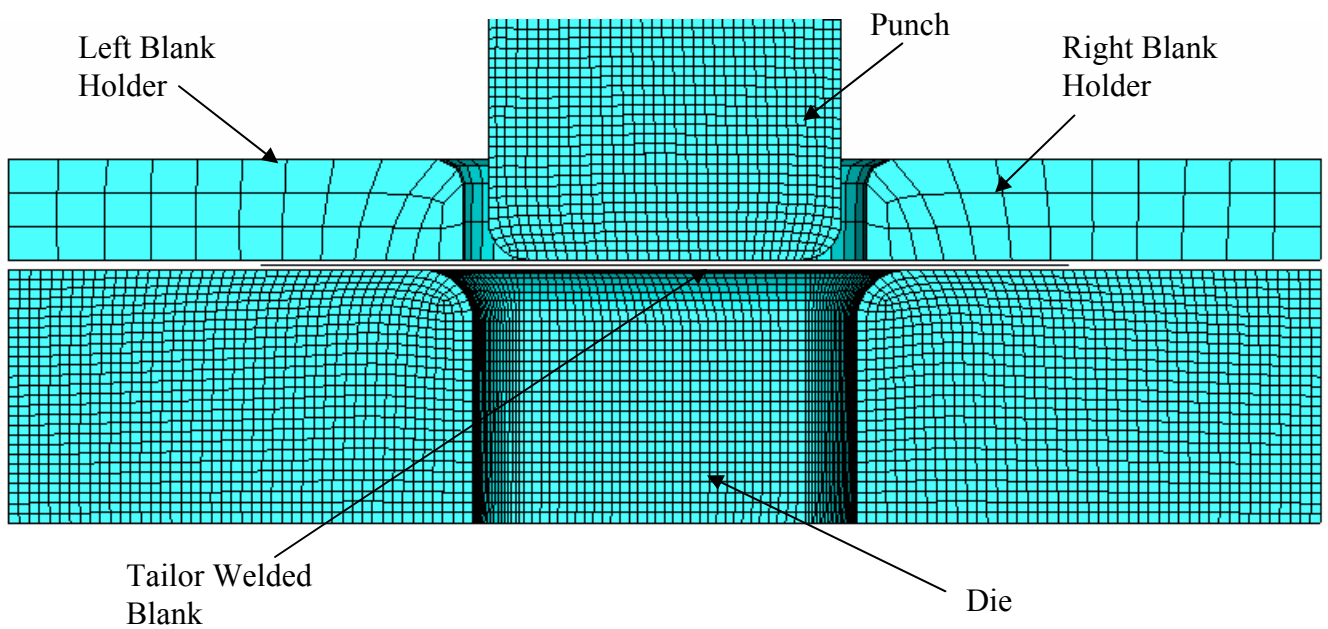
Initial Tool Set Up for Deep Drawing Process
